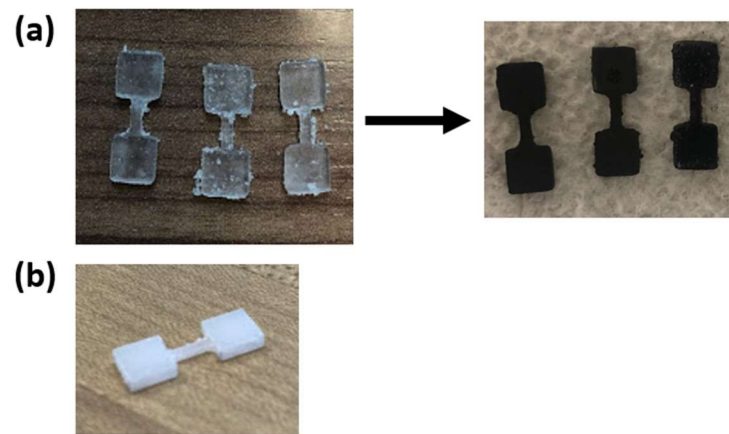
Manufactured sensors, (a) 3D printed sensors made from VeroClear were spray painted for visibility and (b) sensors milled from a sheet of opaque white acrylic.
